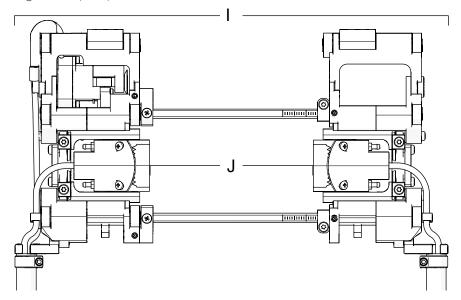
70 mm probe spacing using DJ0034-094 crossbars
